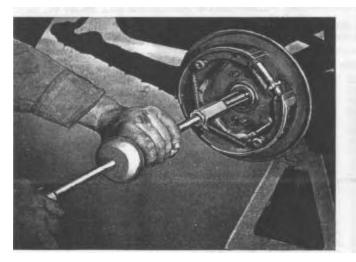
Removing Axle Shaft and Wheel Bearing— J-352 Axle Shaft and Bearing Puller
